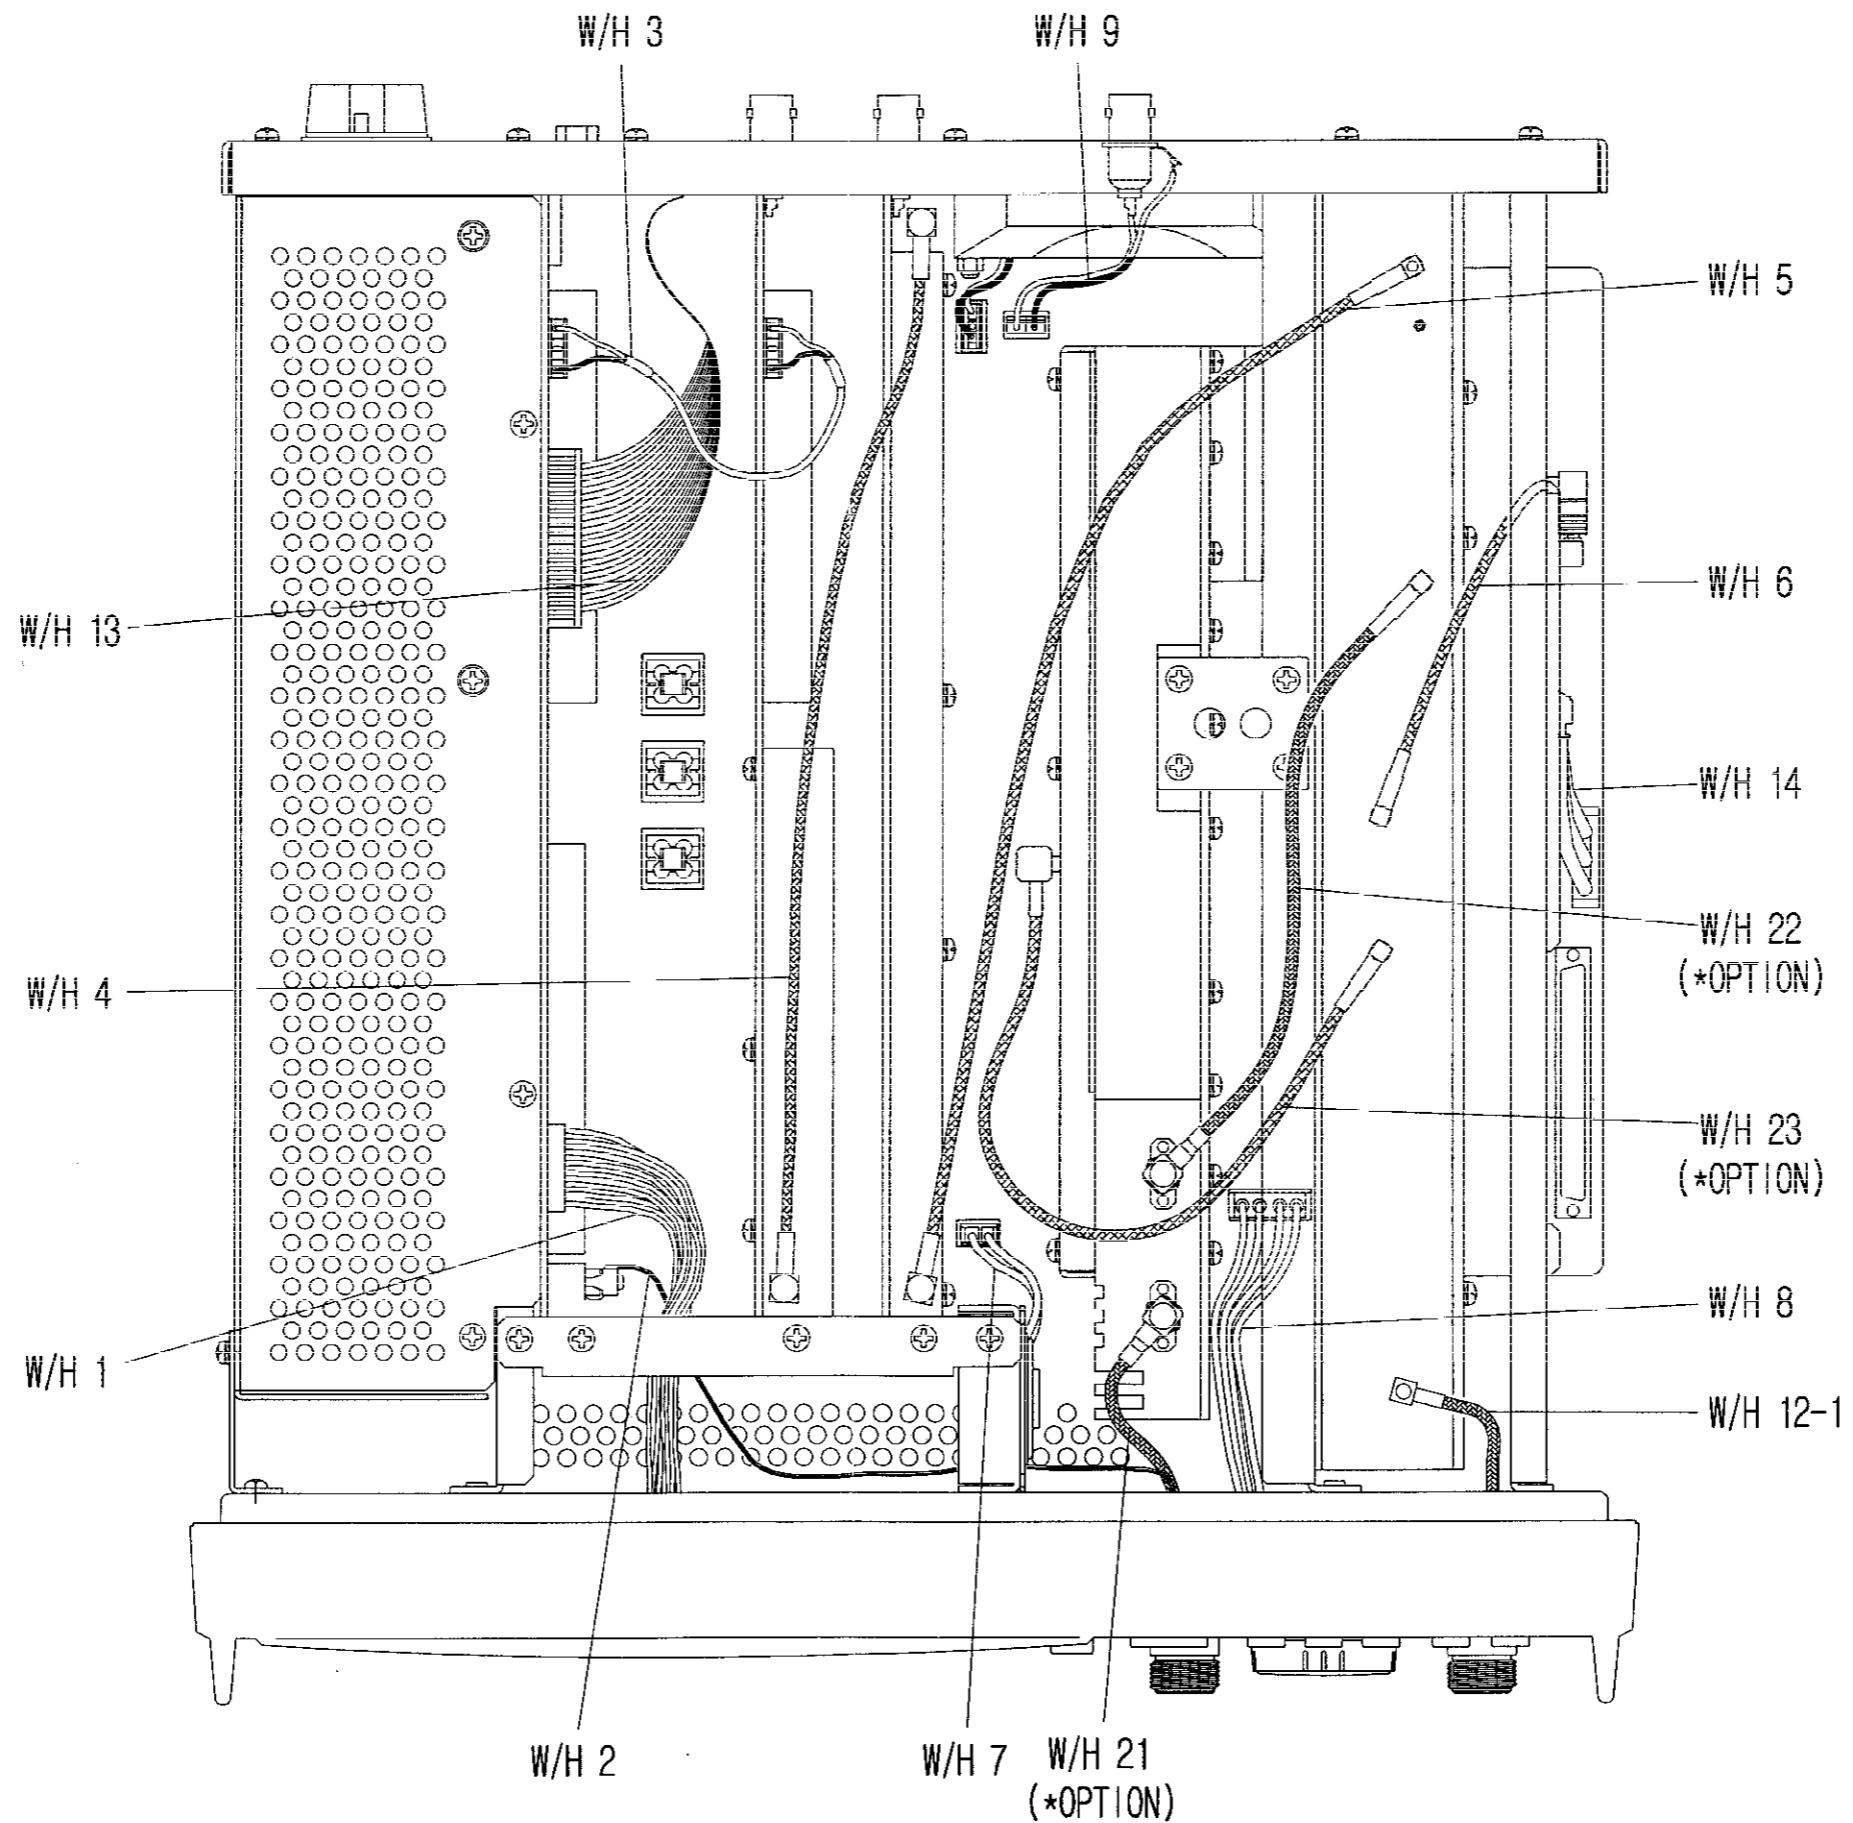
COMPOSITE ASSEMBLY(W/H)
